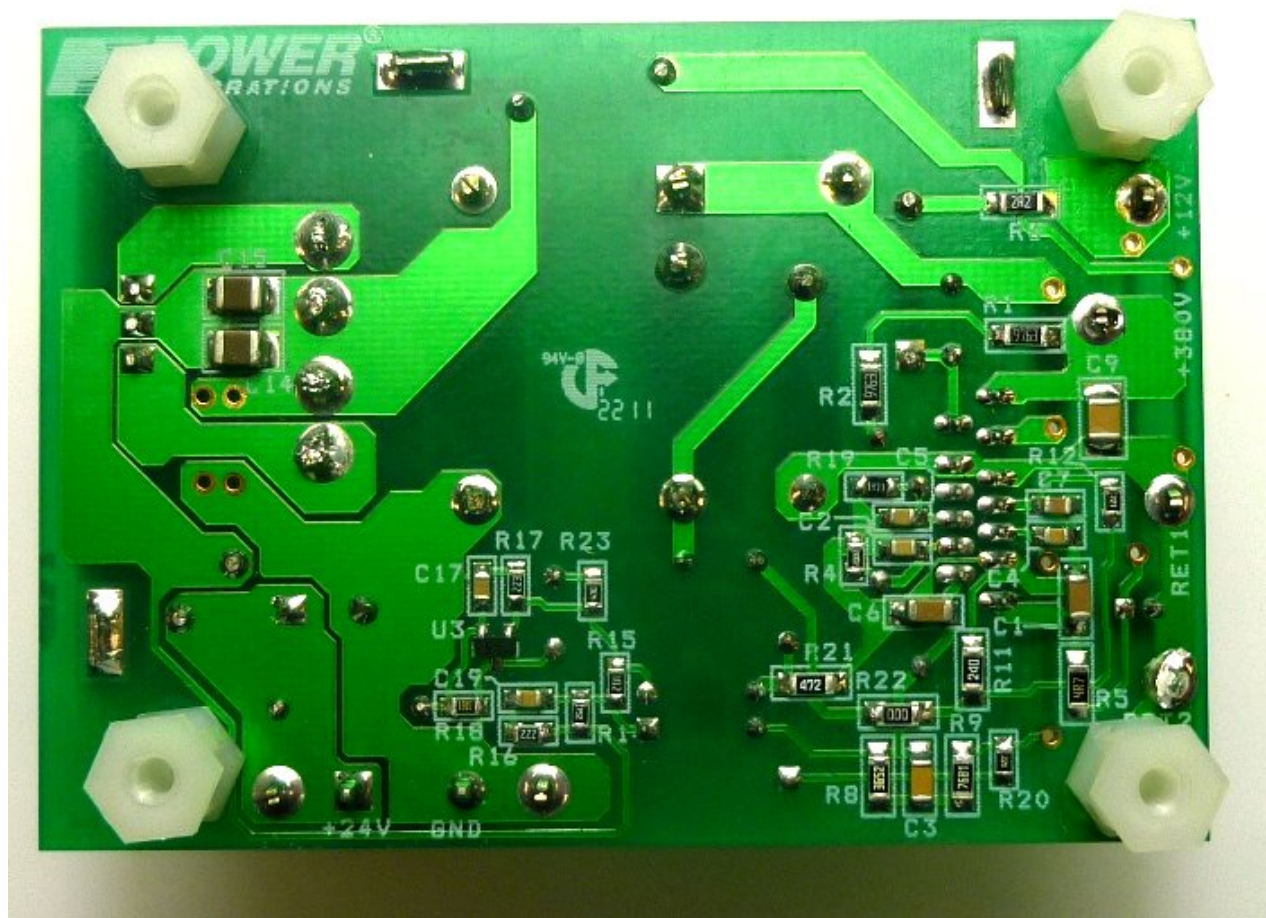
Populated Circuit Board Photograph, Side View (1).
